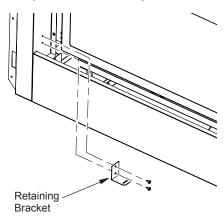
Installing Access Door Retaining Brackets for See-Thru Applications
